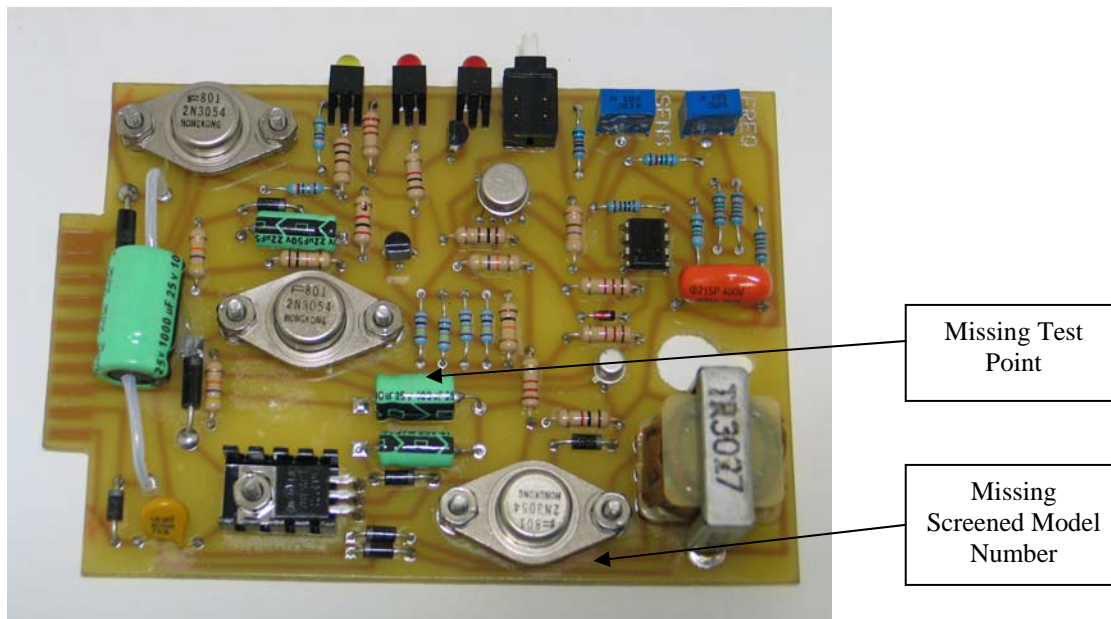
Non-conforming Circuit Board Component Side (Top)
